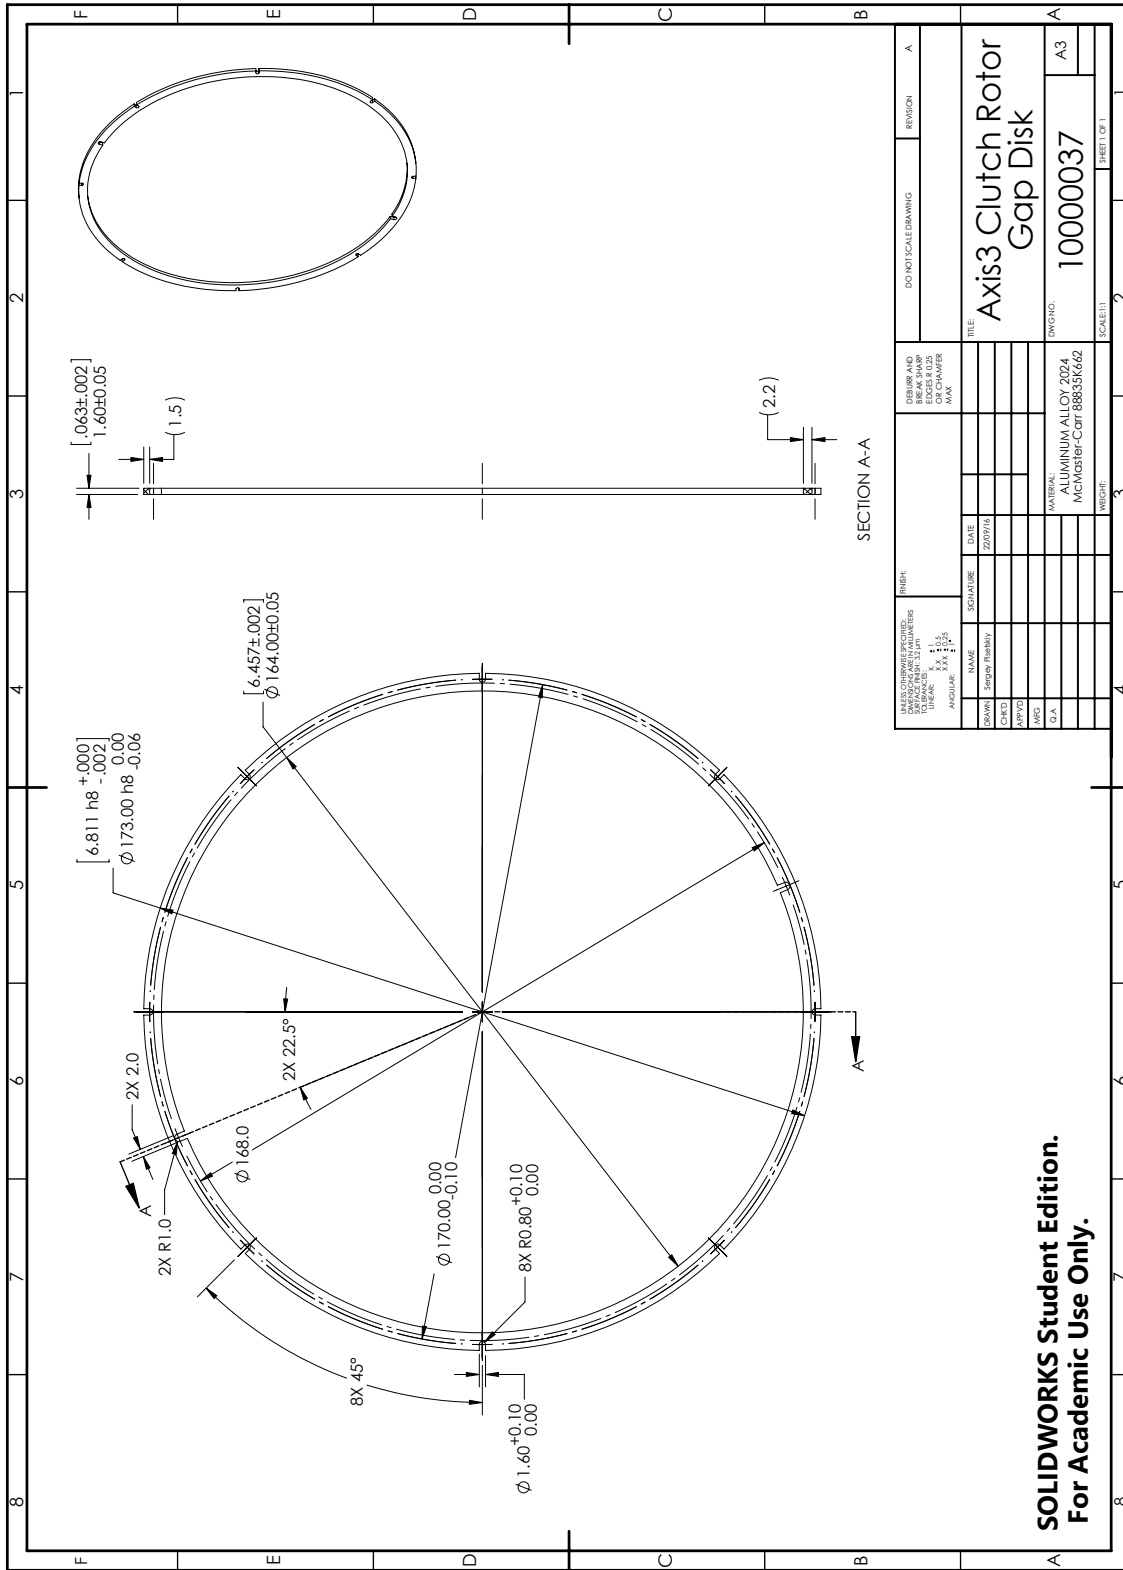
Drawing: Joint 3 clutch rotor spacer.
